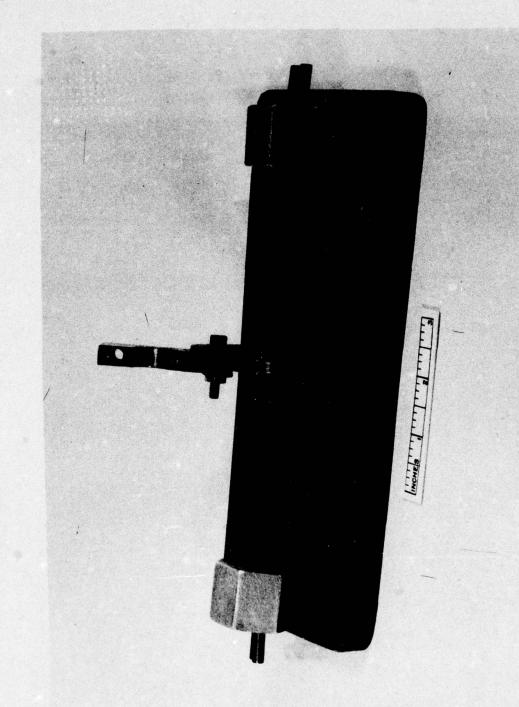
Propellant charge assembly fixture, LAW-LSS.
